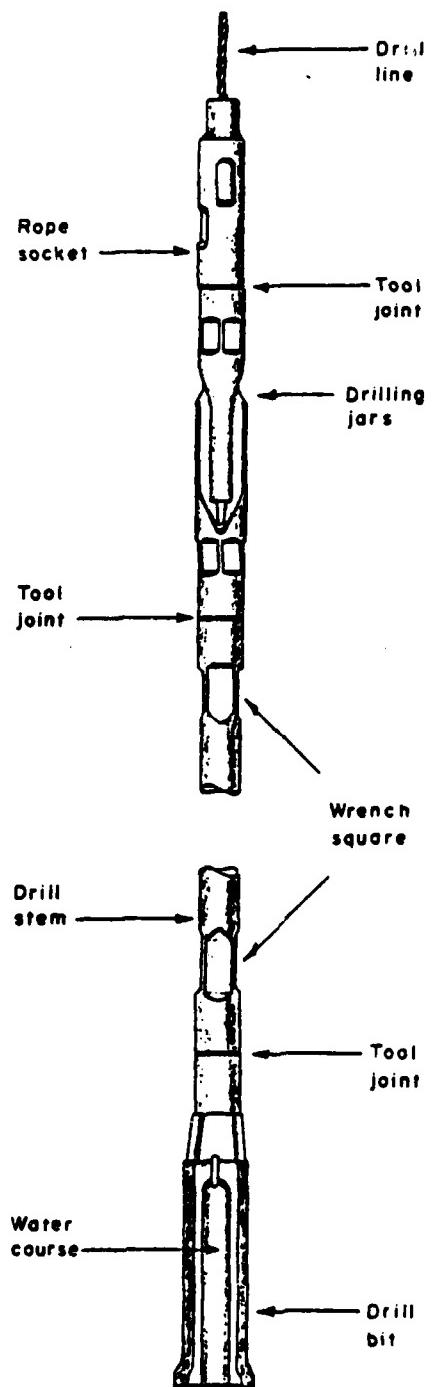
Four Components of the String of Drill Tools for Cable-tool Percussion Drilling.
